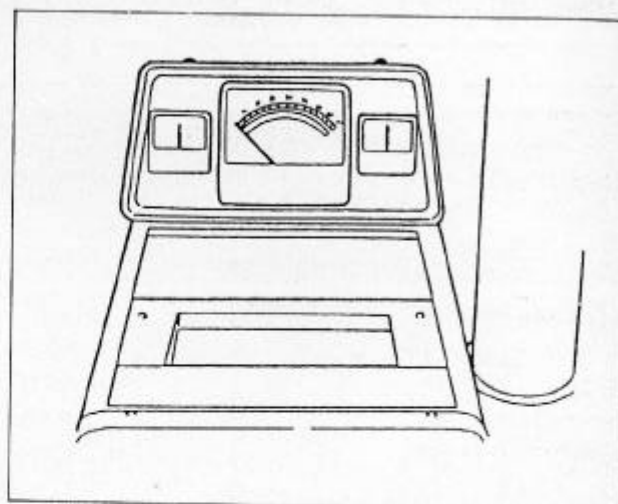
21 TESTER O-RING ADJUSTMENT
